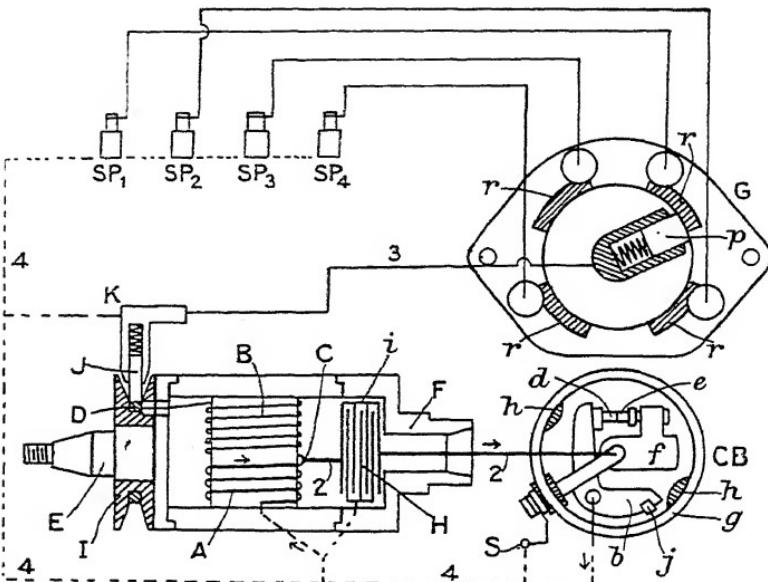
MAGNETO FOR FOUR CYLINDER PETROL ENGINE
